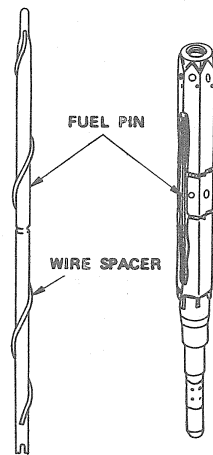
Configuration of Fuel Pin with Wire Spacer and Fuel Subassembly
